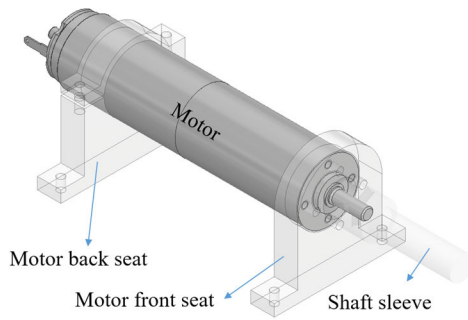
Schematic diagram of motor seat and shaft sleeve.
